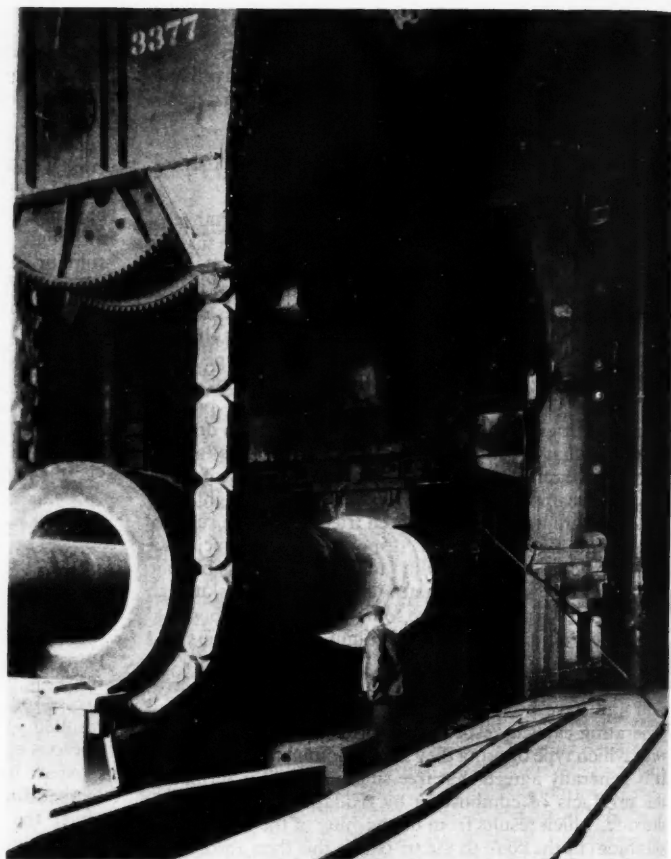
Forging a large boiler drum, under 7000-ton electro-hydraulic press. (Courtesy, English Steel Corporation.)
